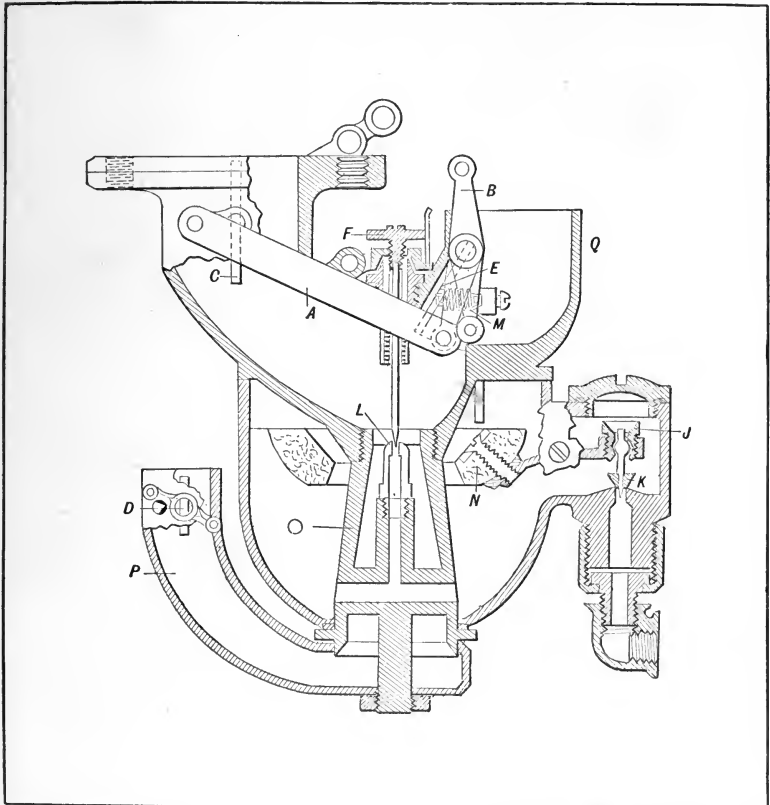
Sectional View of Chapin Carburetor, which Has Mechanical Control of Auxiliary Air Opening and Spray Nozzle Needle.
